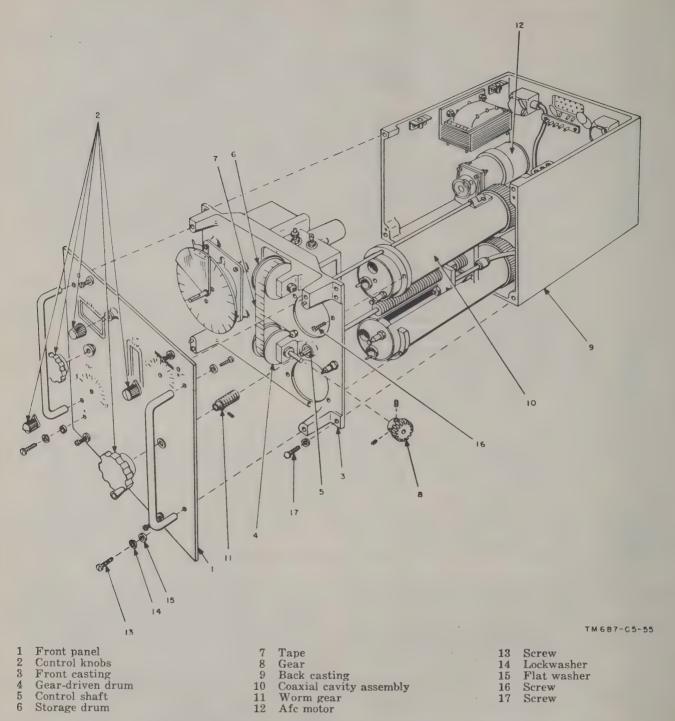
(Added) Receiver D-band rf tuner, disassembled view.
